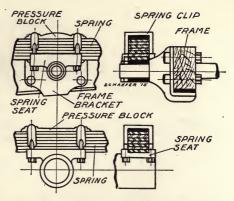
Method of Mounting I.H.C. Full-Elliptic Rear Spring.
